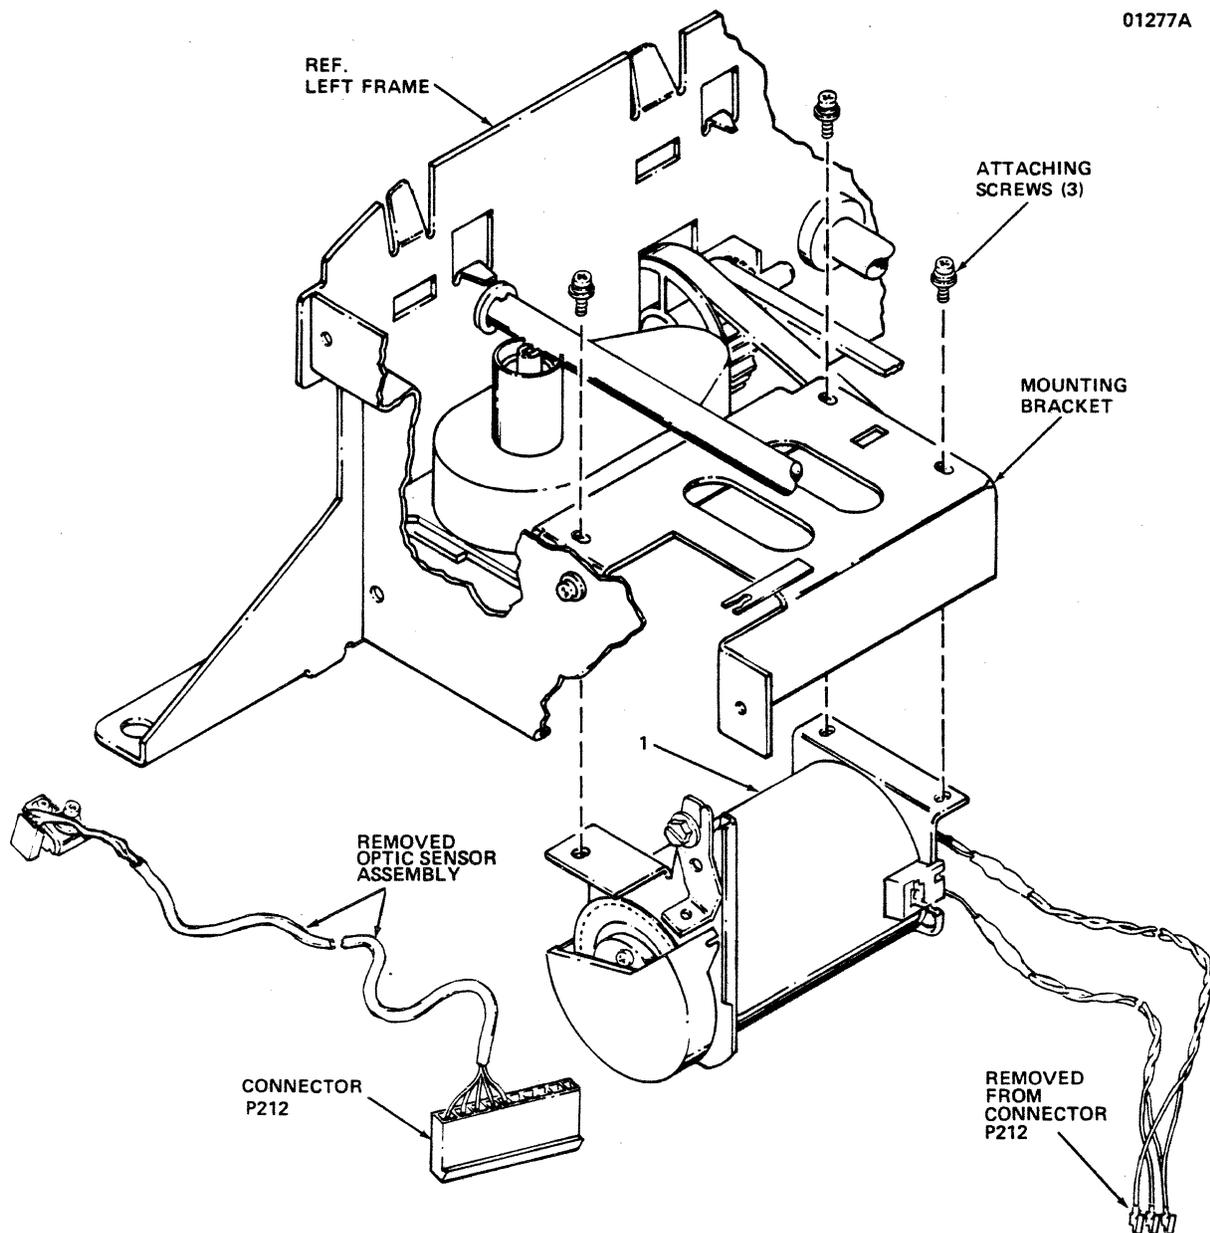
Removal/Replacement, Carriage Drive Motor
